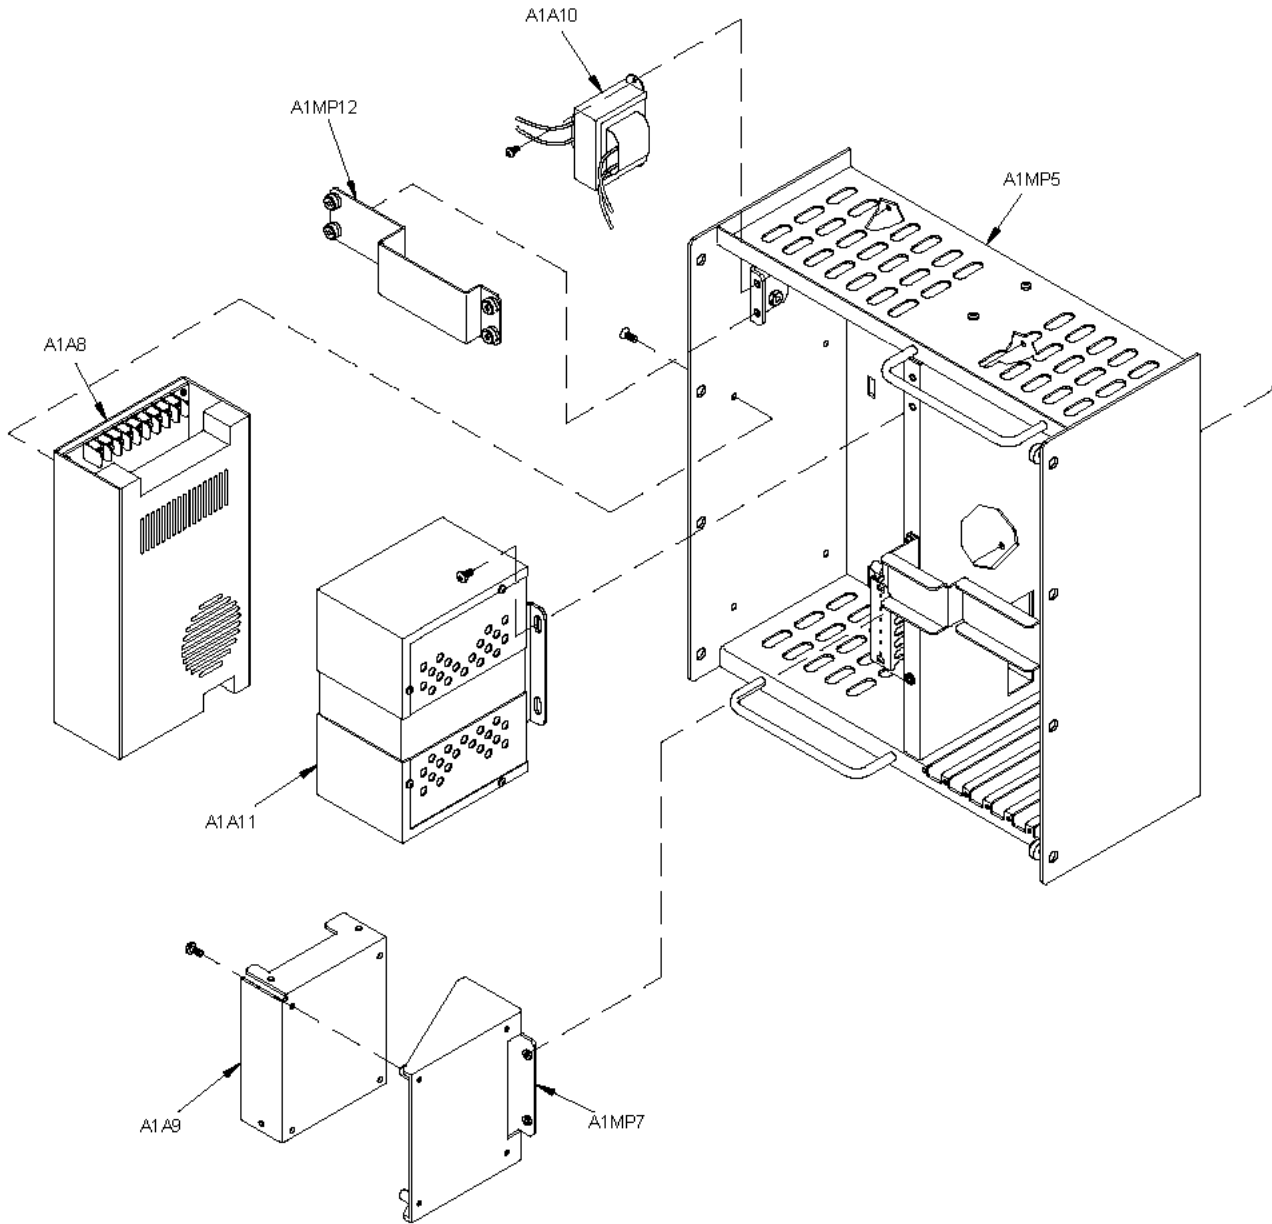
Card Cage Assembly (A1), Bottom View (Sheet 3)
